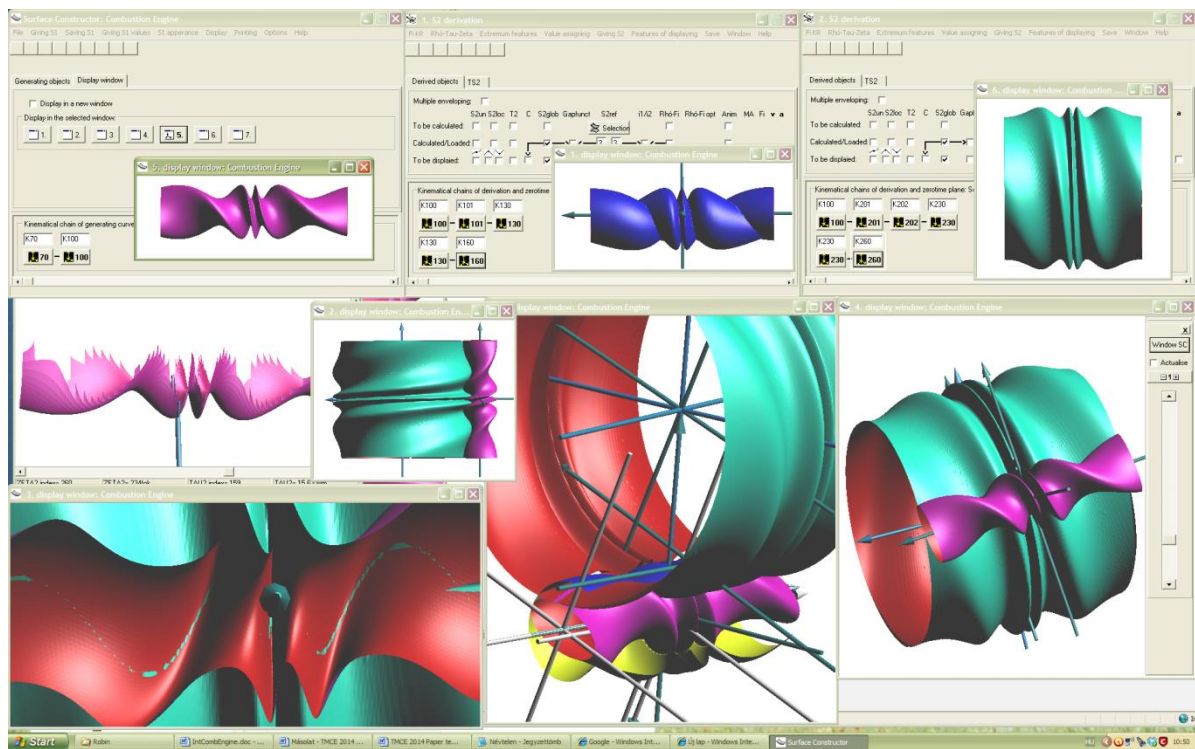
Designing the rotor, the rotary chamber and the grinding wheel surface for a patented rotary internal combustion engine [15].
